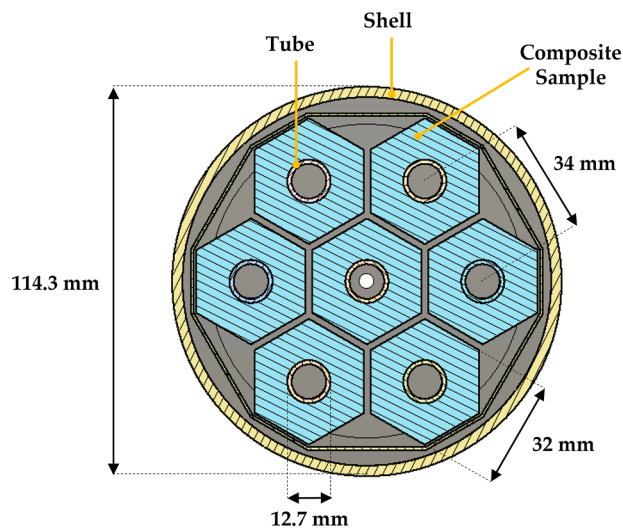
Frontal cross section through the reactor showing the arrangement of the seven tubes, ENG and shell with key dimensions detailed.
